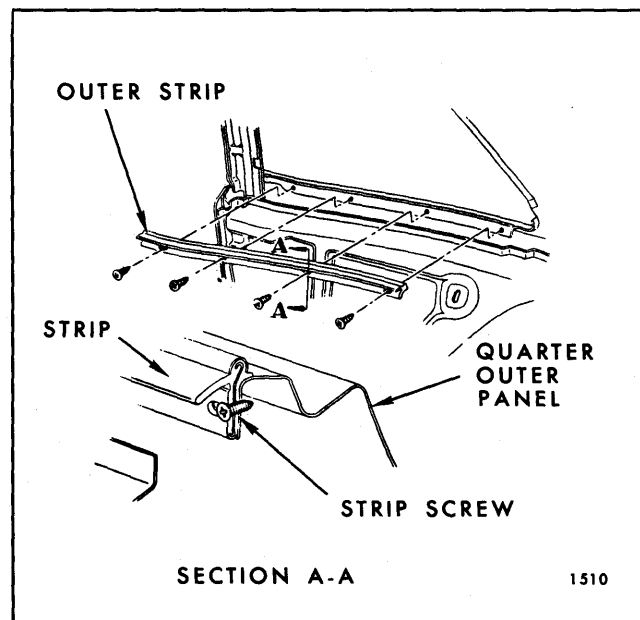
Rear Quarter Window Outer Strip Assembly
